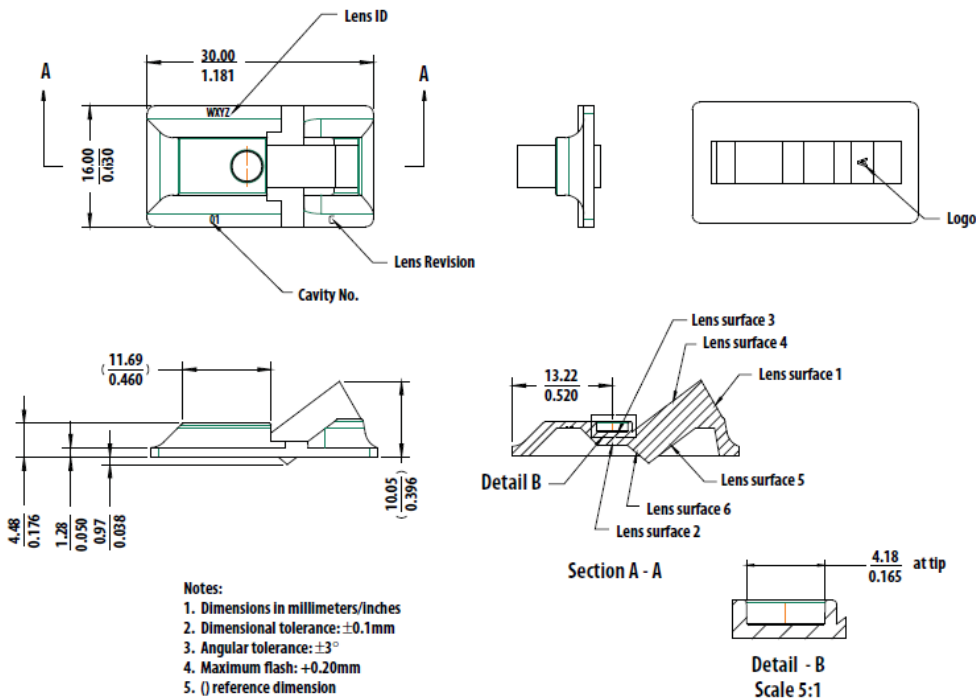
ADNS-5110-001 trim lens outline drawings and details.
